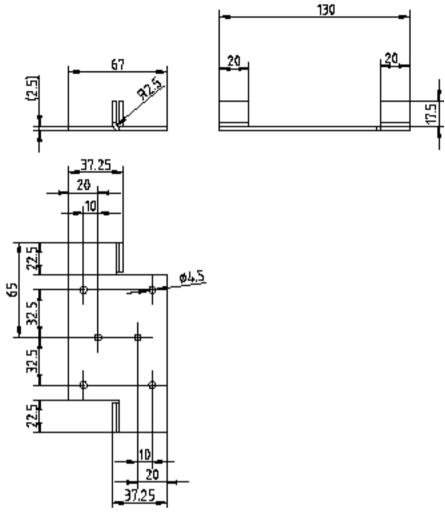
Middle part of mounting support for X-300EEC (dimensions in mm)
